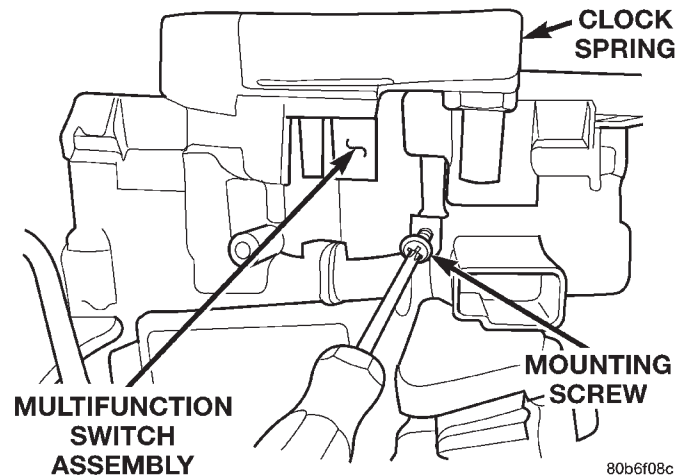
Multi-Function Switch Mounting Housing Screw Remove/Install
